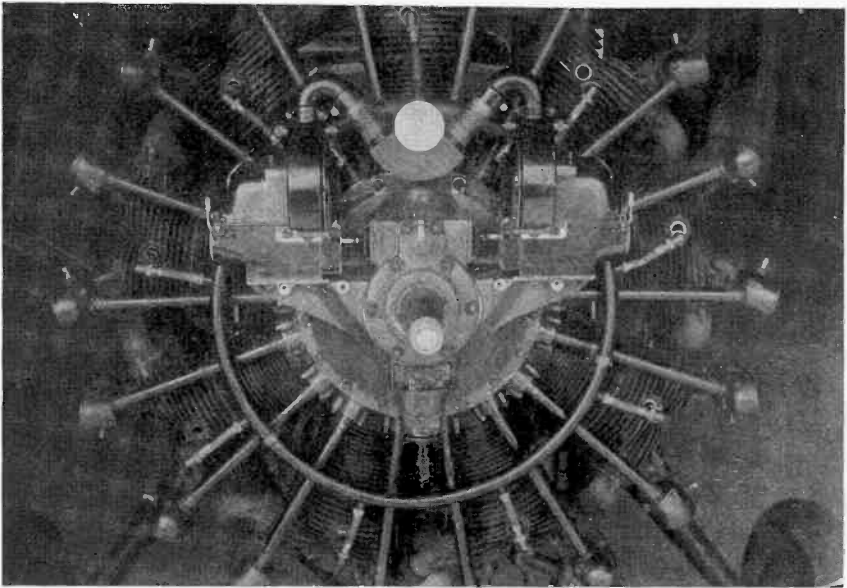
Improved shielding installation on Wright J-5 airplane engine. Flexible metal tubing is used for shielding the exposed portions of the ignition cable.
